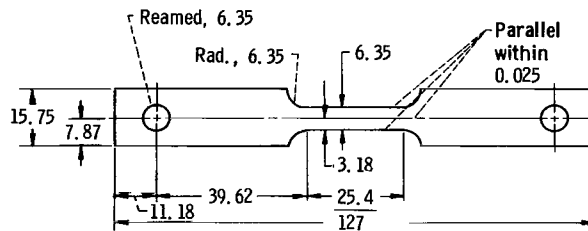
Standard sheet creep-test specimen. (All dimensions are in millimeters.)
